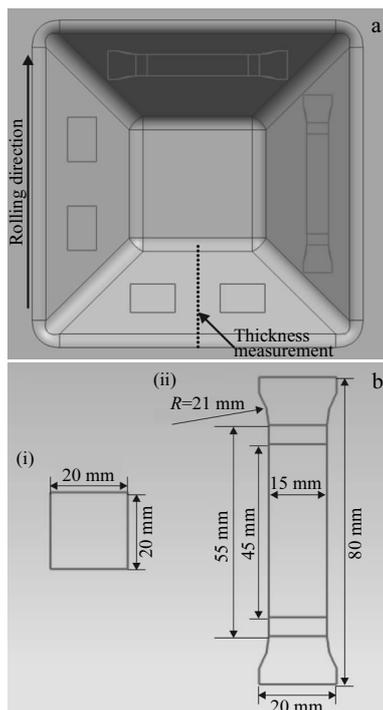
Sketch of test samples obtained by wire electrical discharge machining: (a) locations of the obtained samples and (b) geometrical dimensions of samples (i: surface quality and micro-hardness, ii: tensile test)
